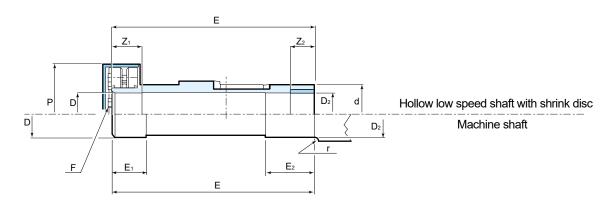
Hollow low speed shaft and machine shaft end with shrink disc
